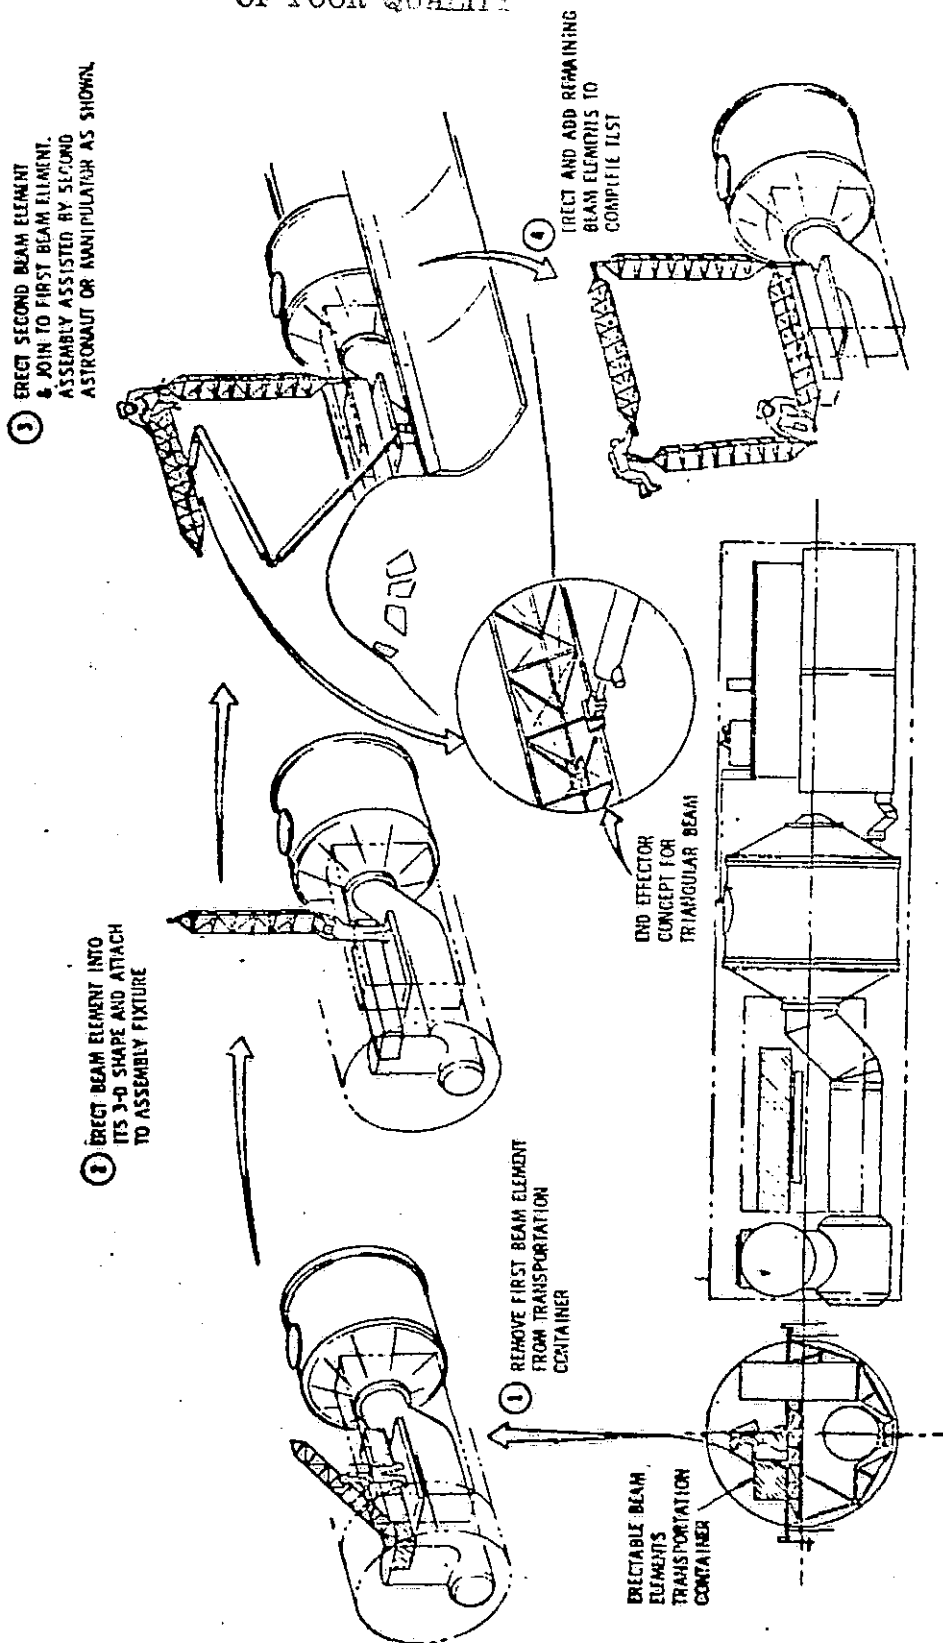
Assembly Sequence - Erectable Beam Tests
